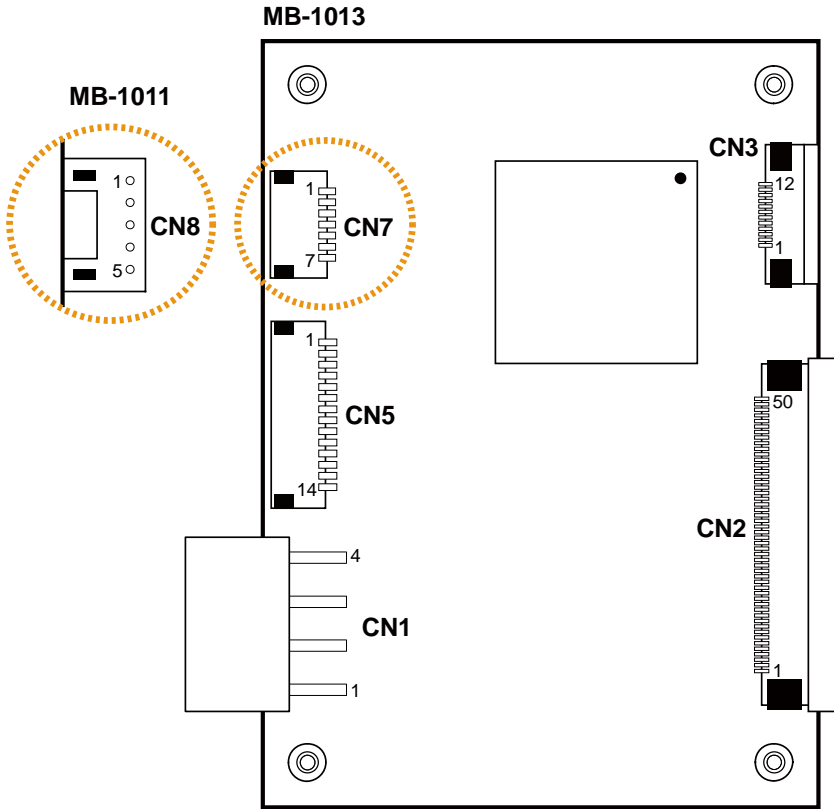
MB-1011 & MB-1013 Printer Board Component Locations
